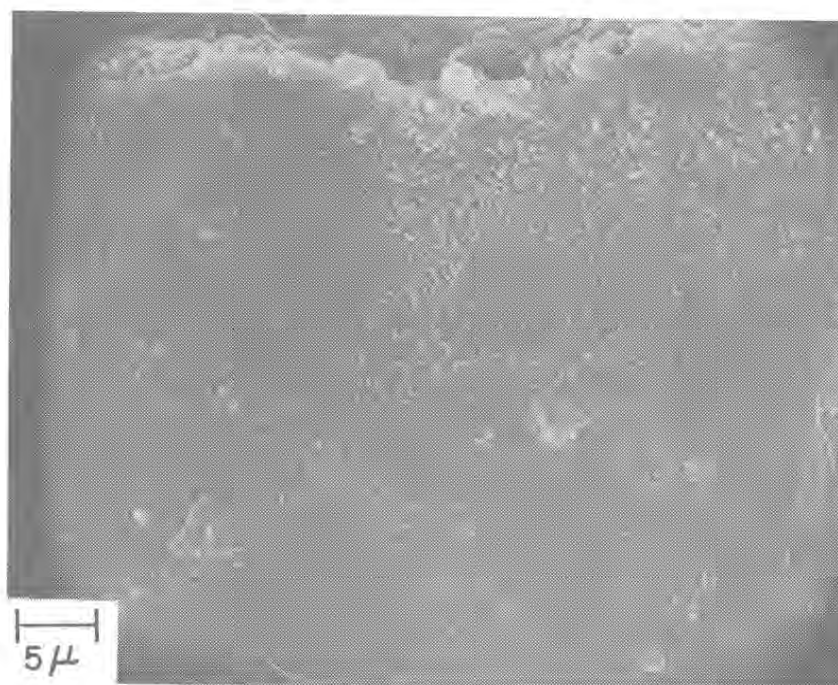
Fracture surface through an EDM cut edge in sample 5 of B_4C showing preferential removal of high porosity areas.
